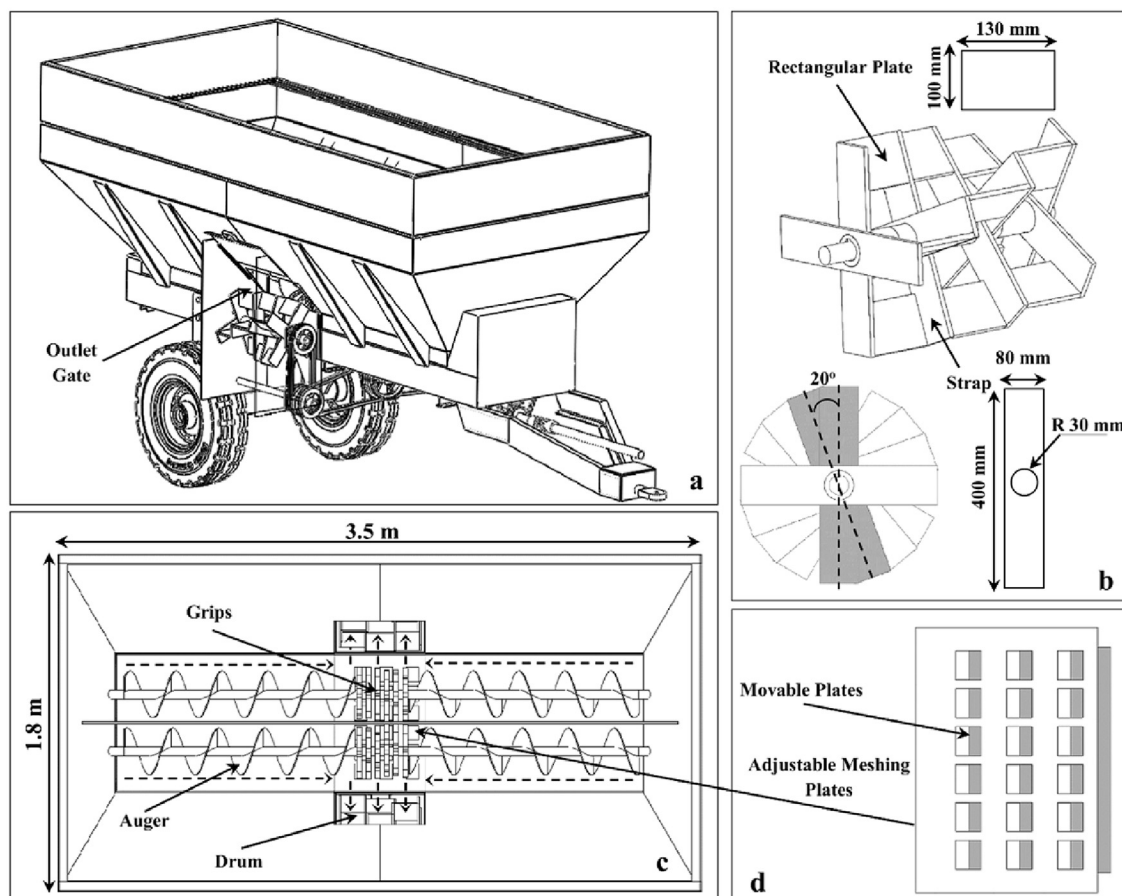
(a) Helical manure distributor machine, (b) distribution unit of the machine (drum), (c) top view of the machine, (d) adjustable meshing plates.
